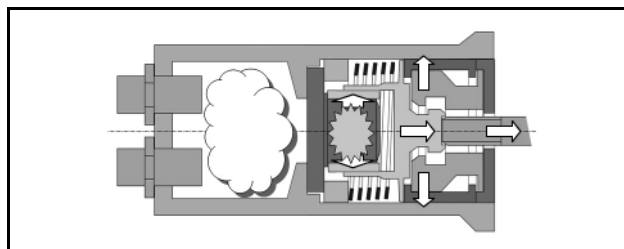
Step 4: Opening of the threaded segments and bolt release.
